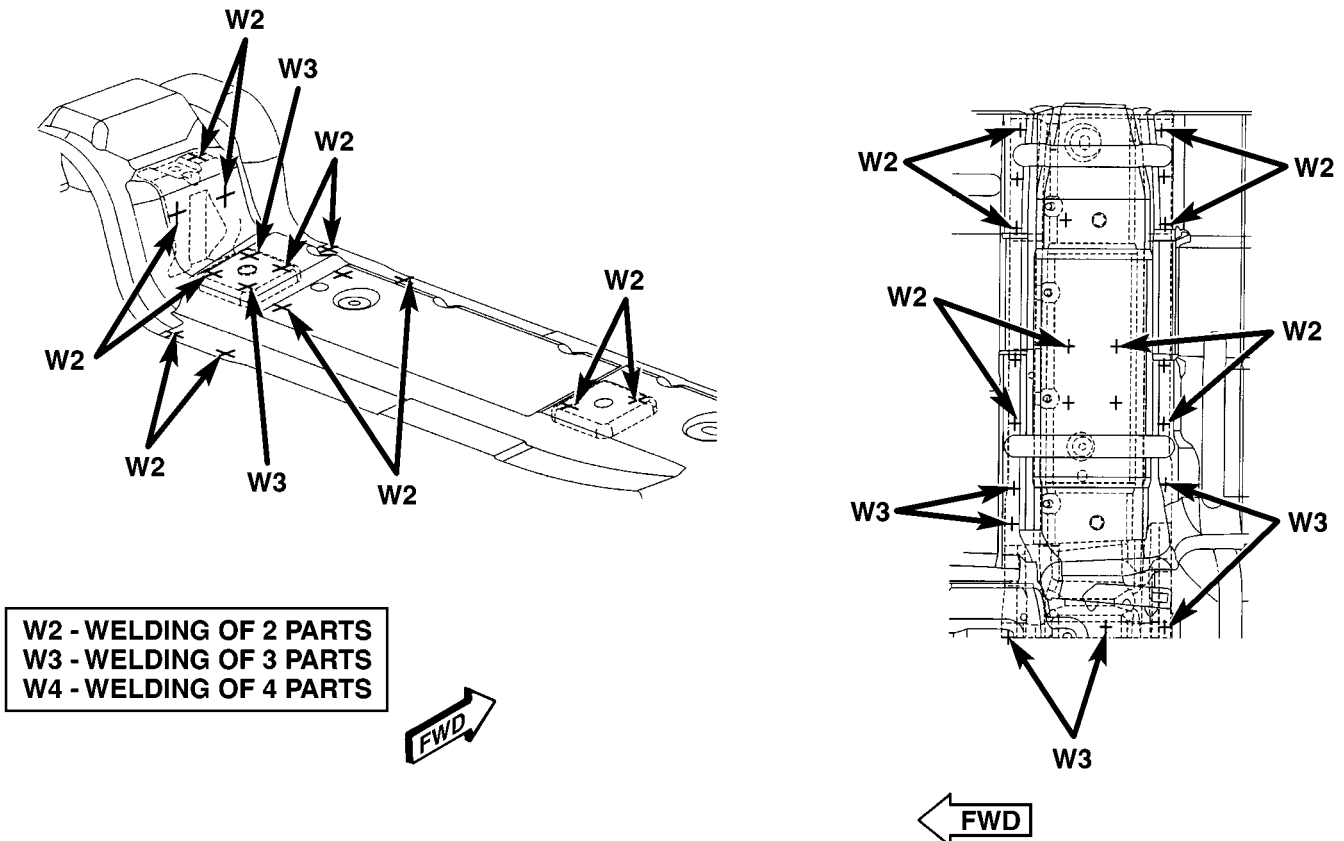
SEAT MOUNTING CROSSMEMBER TO TUNNEL REINFORCEMENT TO FRONT CONSOLE MOUNTING BRACKET
